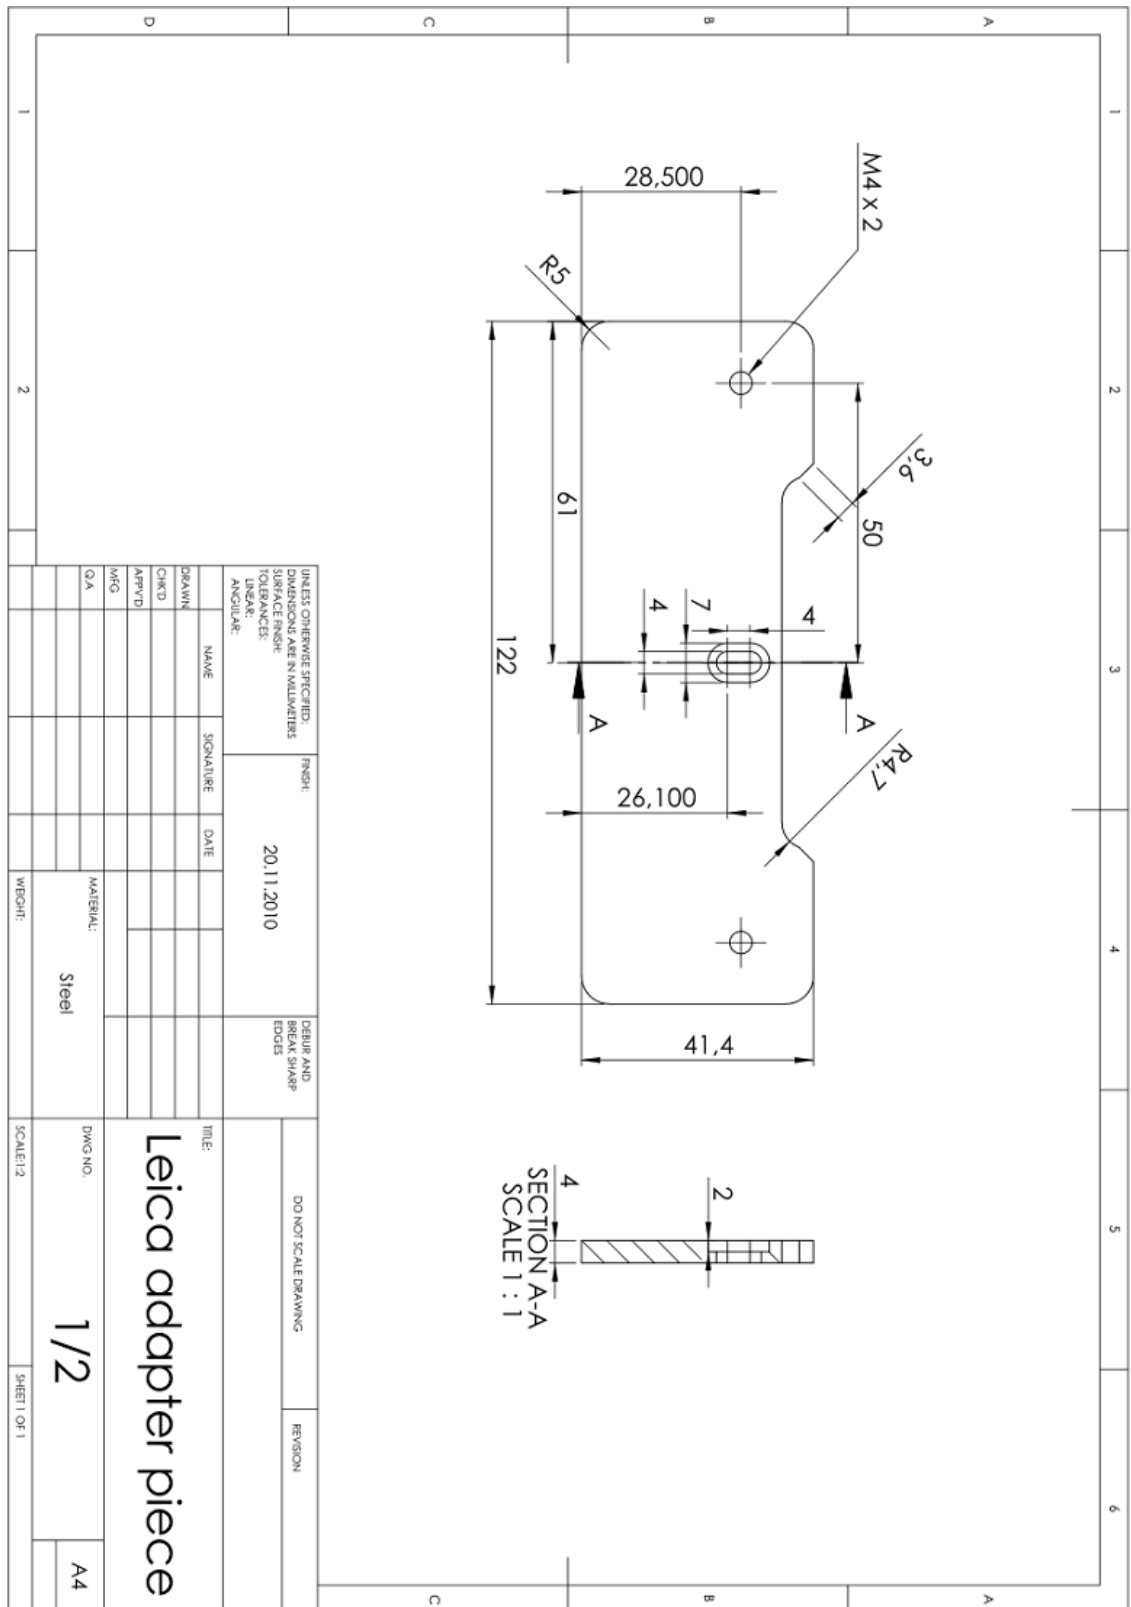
Front adapter piece for Quickslide stage. Drawing is made with AutoCAD2007 and all dimensions are in millimeters.
